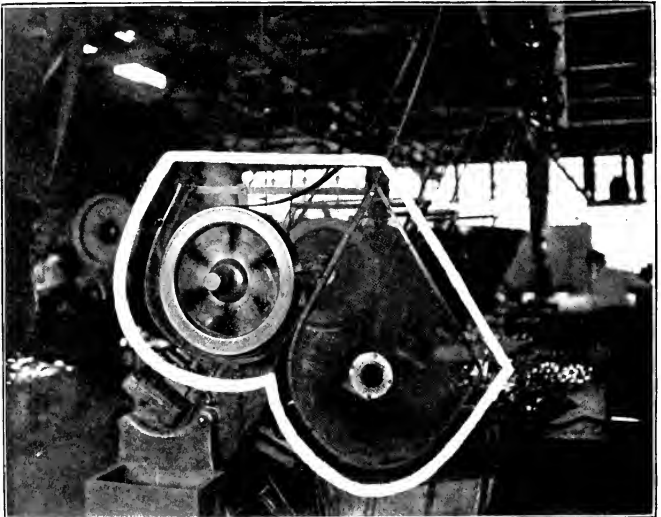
Illustration No. 30. Stamping press flywheel with wire mesh guard. Guard open.
